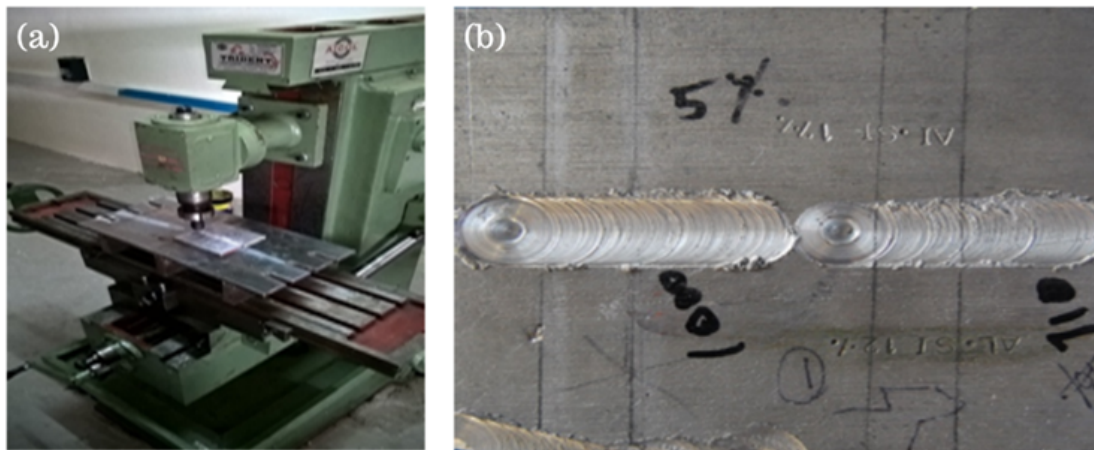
(a) Vertical milling machine setup; (b) friction-welded Al-Si specimen.
